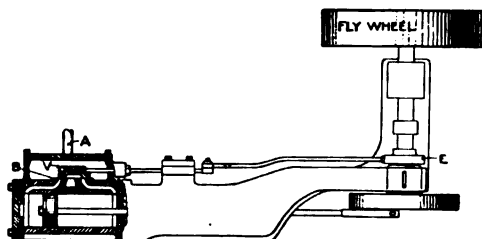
Horizontal view of a steam engine.—A, steam-pipe; B, exhaust port; E, eccentric; V, distributing valve.
